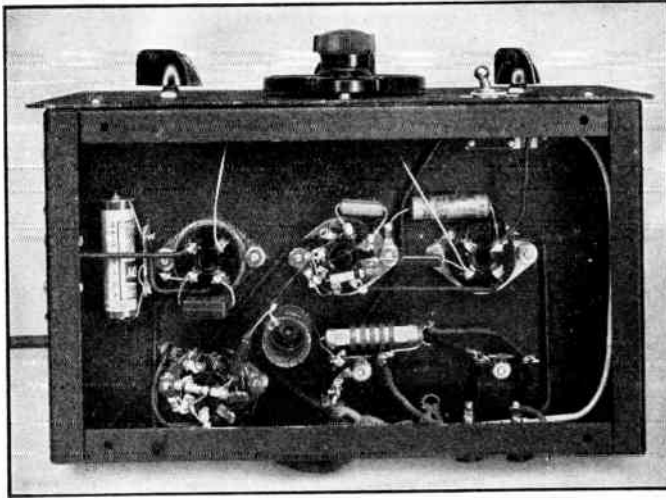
Below-chassis view of the two-tube superhet. The i.f. circuit is underneath the chassis; no adjustment of its frequency is necessary. Since few parts are used, the remaining wiring is quite simple.
